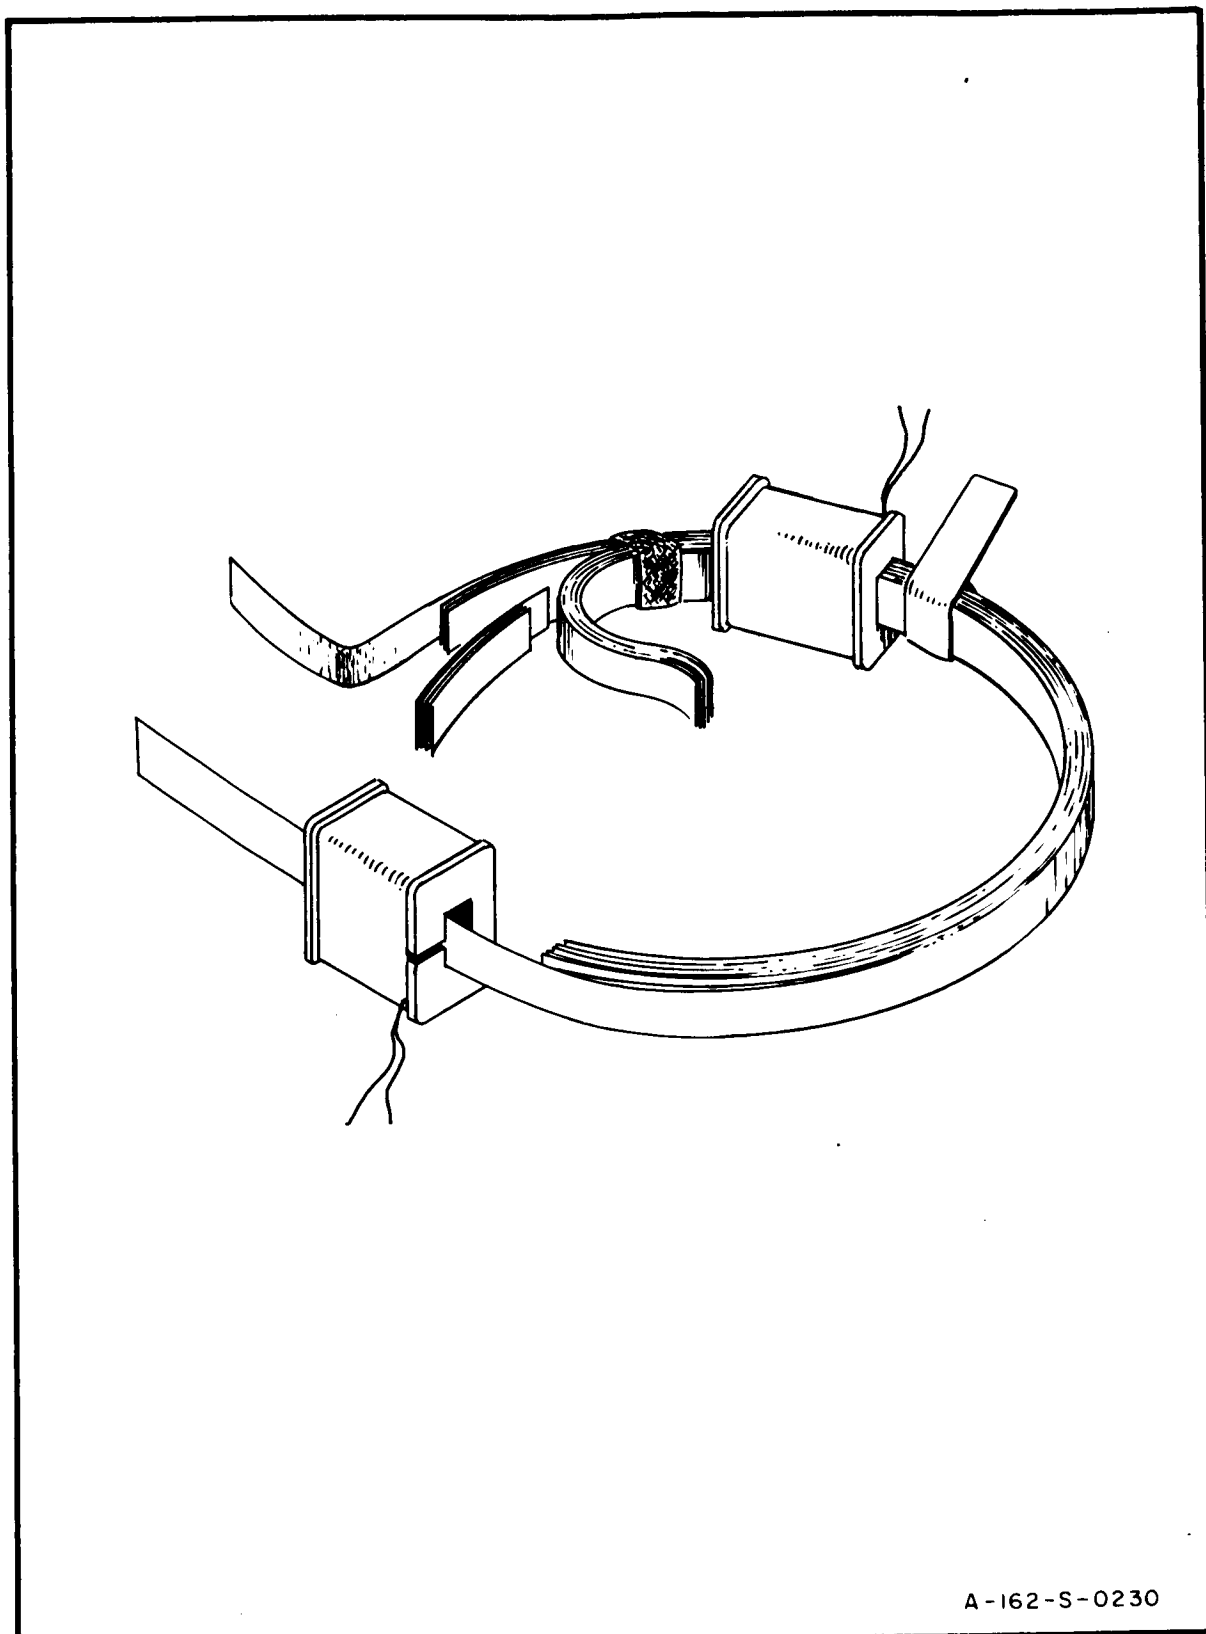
PRELIMINARY MAGNET ASSEMBLY DETAILS
